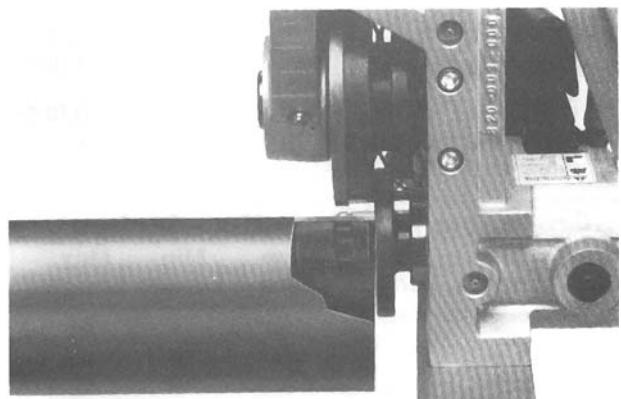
Close-Up of Pipe Against Drive Roll Flange
